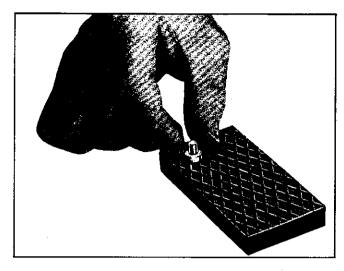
Lapping Flat Surfaces of Spray Tip Valve.
